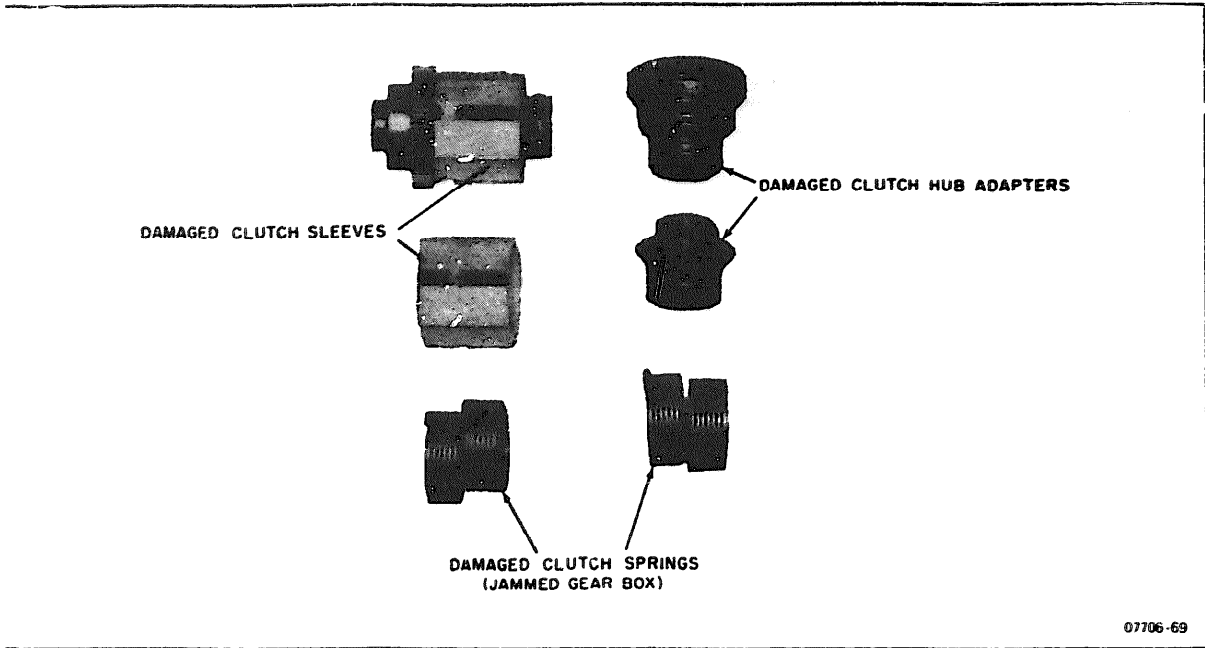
Excessive Wear on Clutch and Hub Assembly
